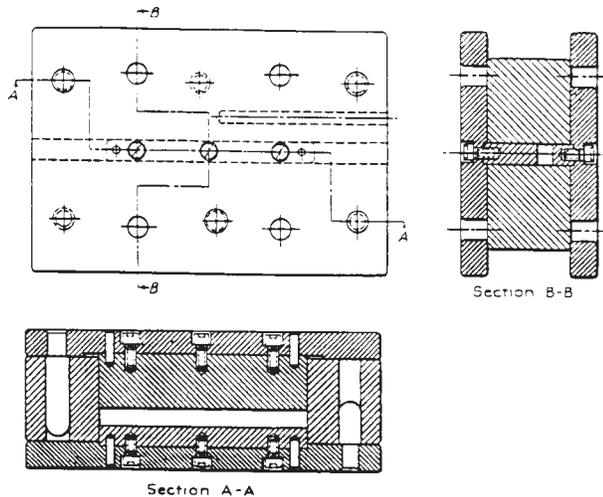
Single-Cavity Positive-Compression Mold for Bar Test Specimens
